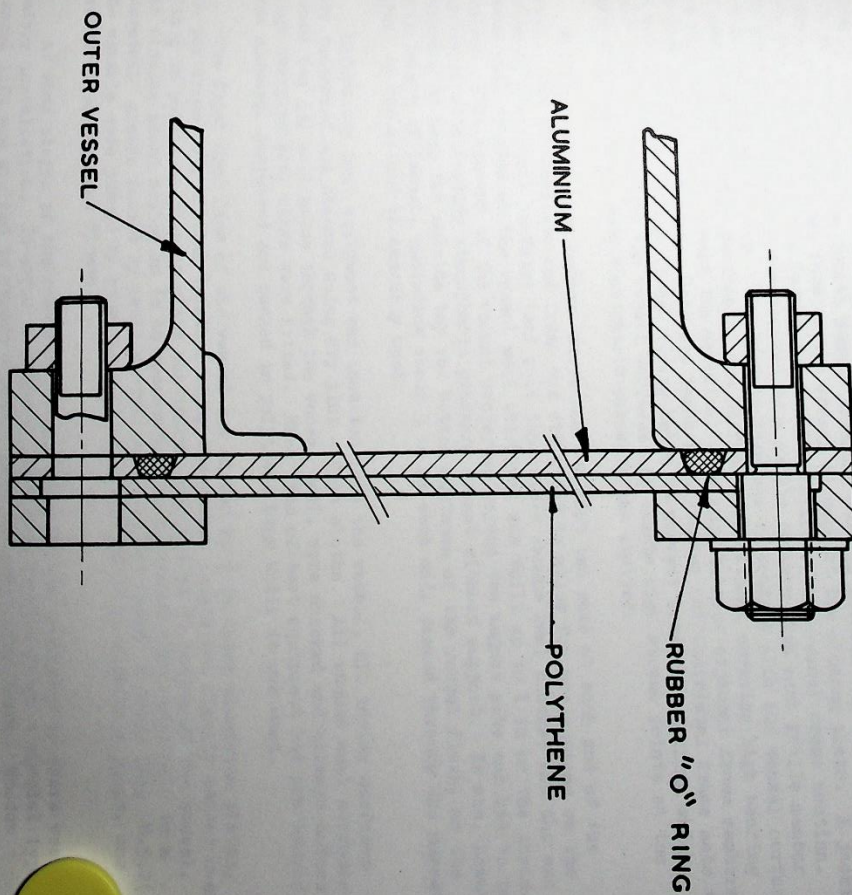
(iii) Typical Section through Test Seal on Front Flange.
